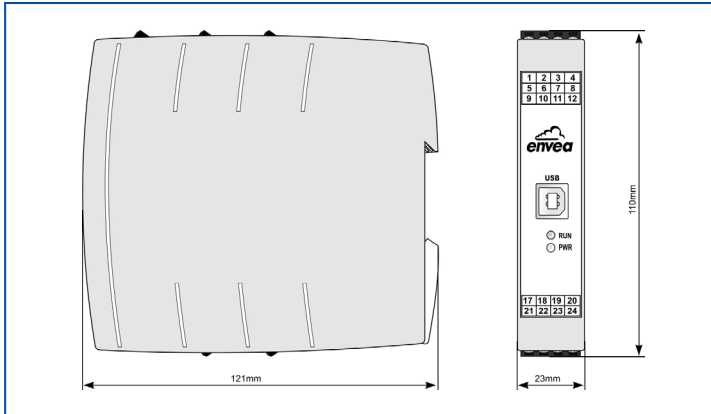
Dimension of evaluation unit in DIN Rail housing
